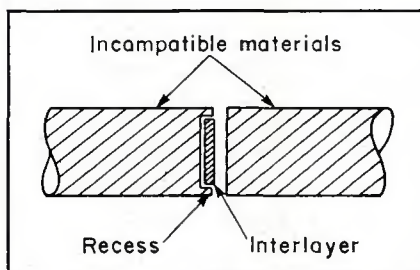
Schematic of component arrangement in three-element friction welding
